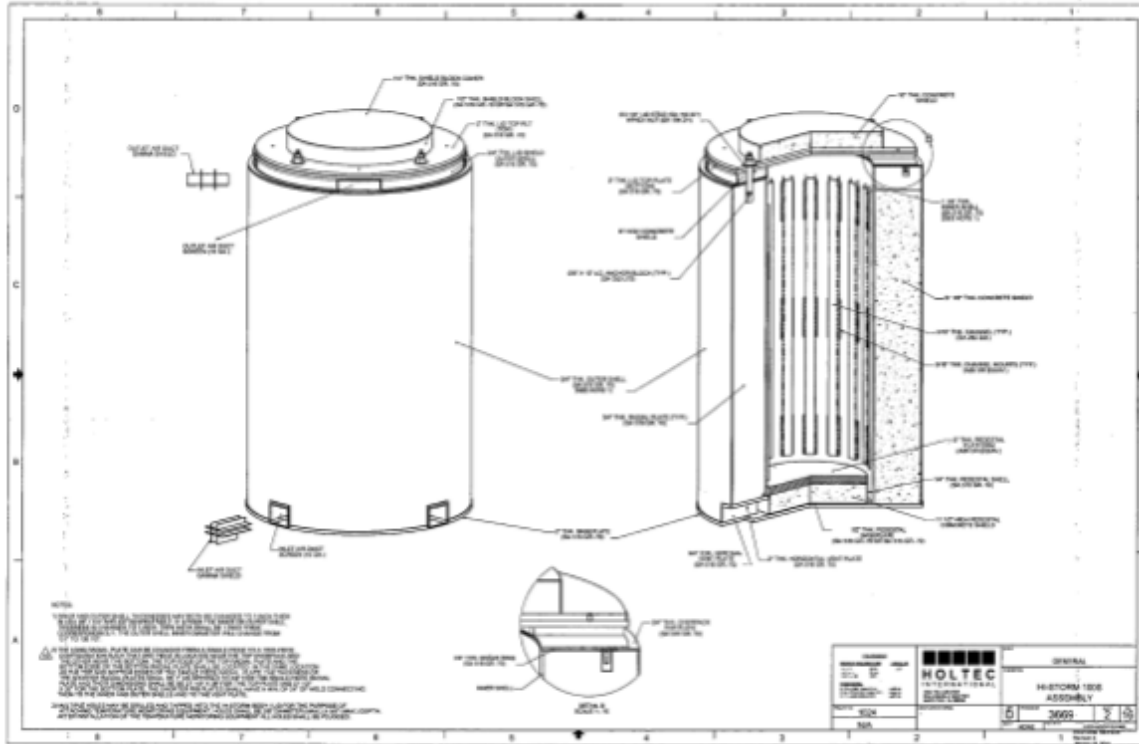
Cross sectional view of the Holtec HI-STORM 100S design with cutaway section showing structure between overpack and MPC walls.[7]
